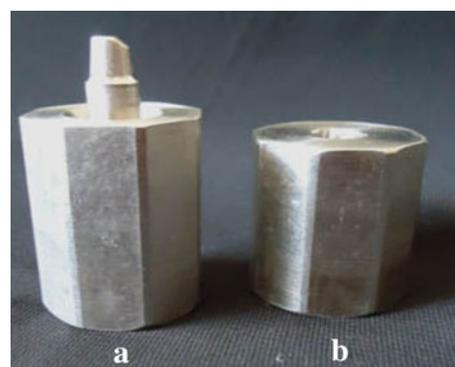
a Axial view of custom-made stainless steel model, b stainless steel former assembly
